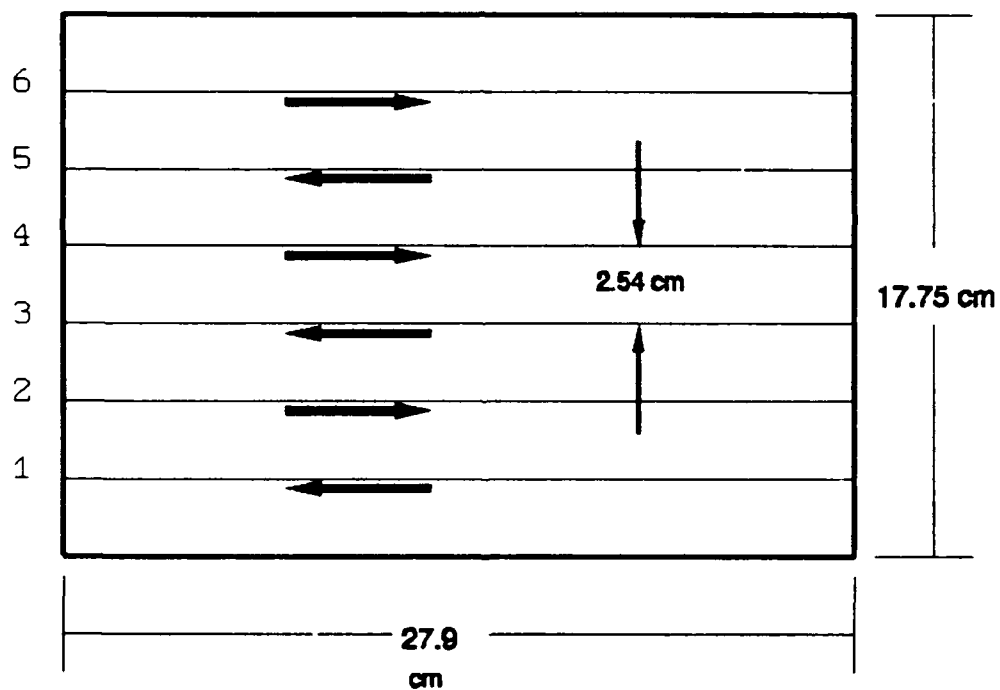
Moving arc layout for aluminum welds. Spacing between successive passes is identical.
